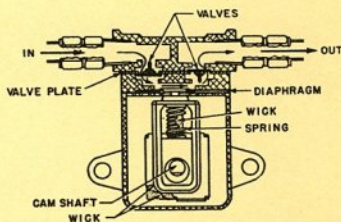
HEATER FUEL PUMP - SECTIONAL VIEW
